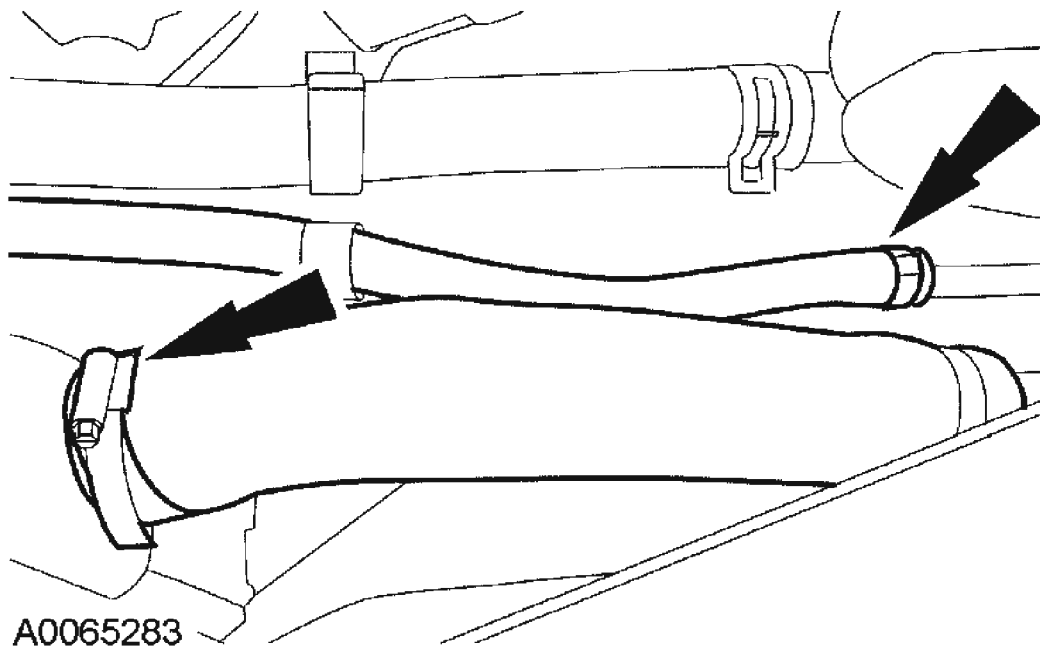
Disconnecting Fuel Tank Vent Tubes And Filler Pipe
